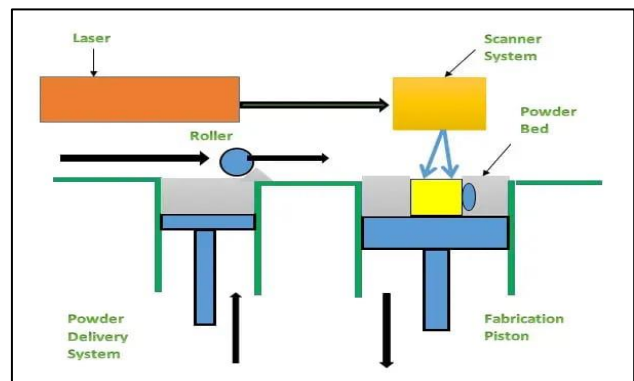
Schematic diagram of selective laser sintering in 3D printing
